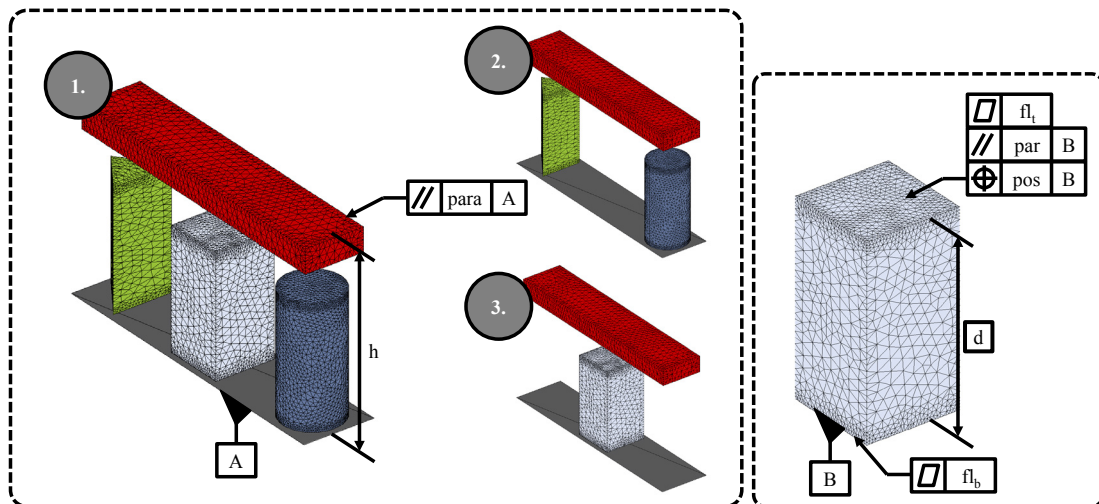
Tolerance Stack-Up for different Part Configurations and Part Tolerancing Scheme
